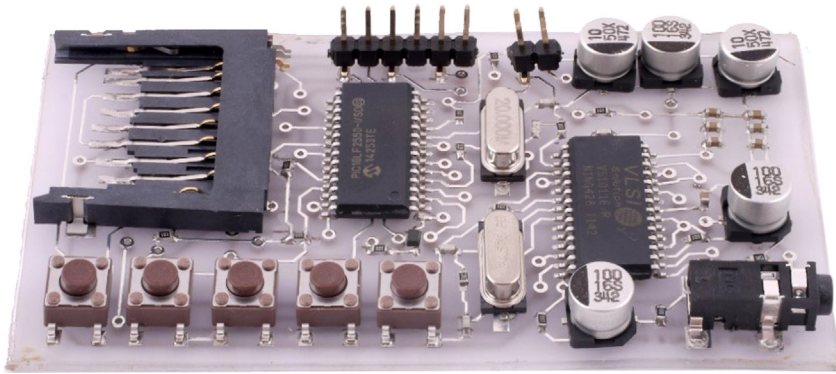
PCB assembly with SMD components on a biodegradable circuit, soldered with optimized VPS (170°C Galden with sample holder movement).
